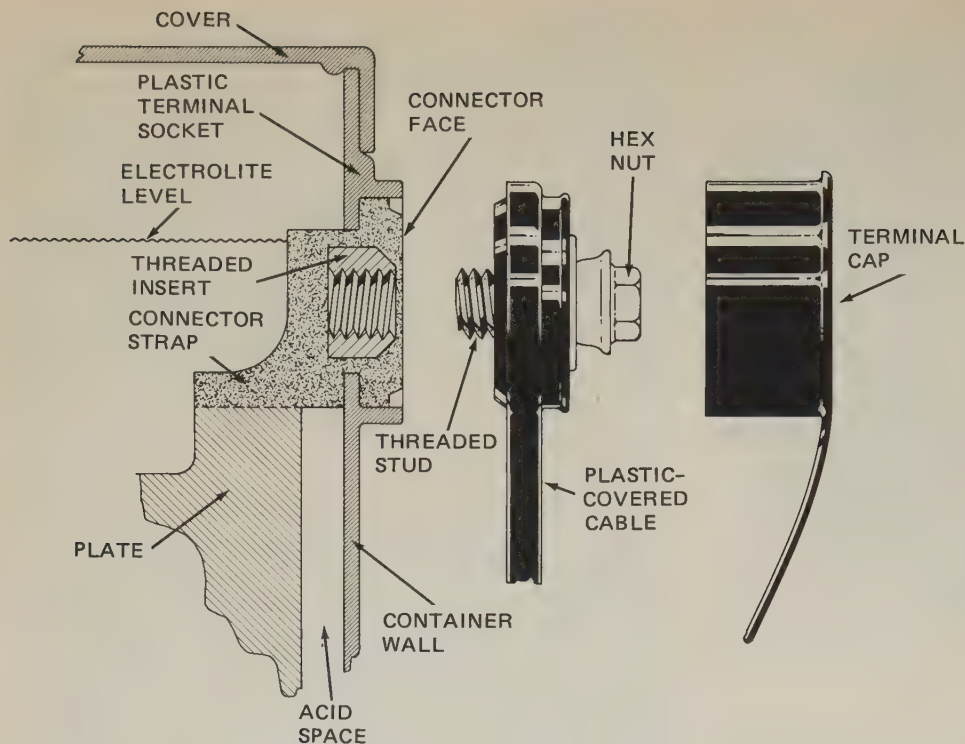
Sectional view showing construction of a side-terminal battery with the cable, stud, and terminal cap assembly. (Gould, Inc.)
